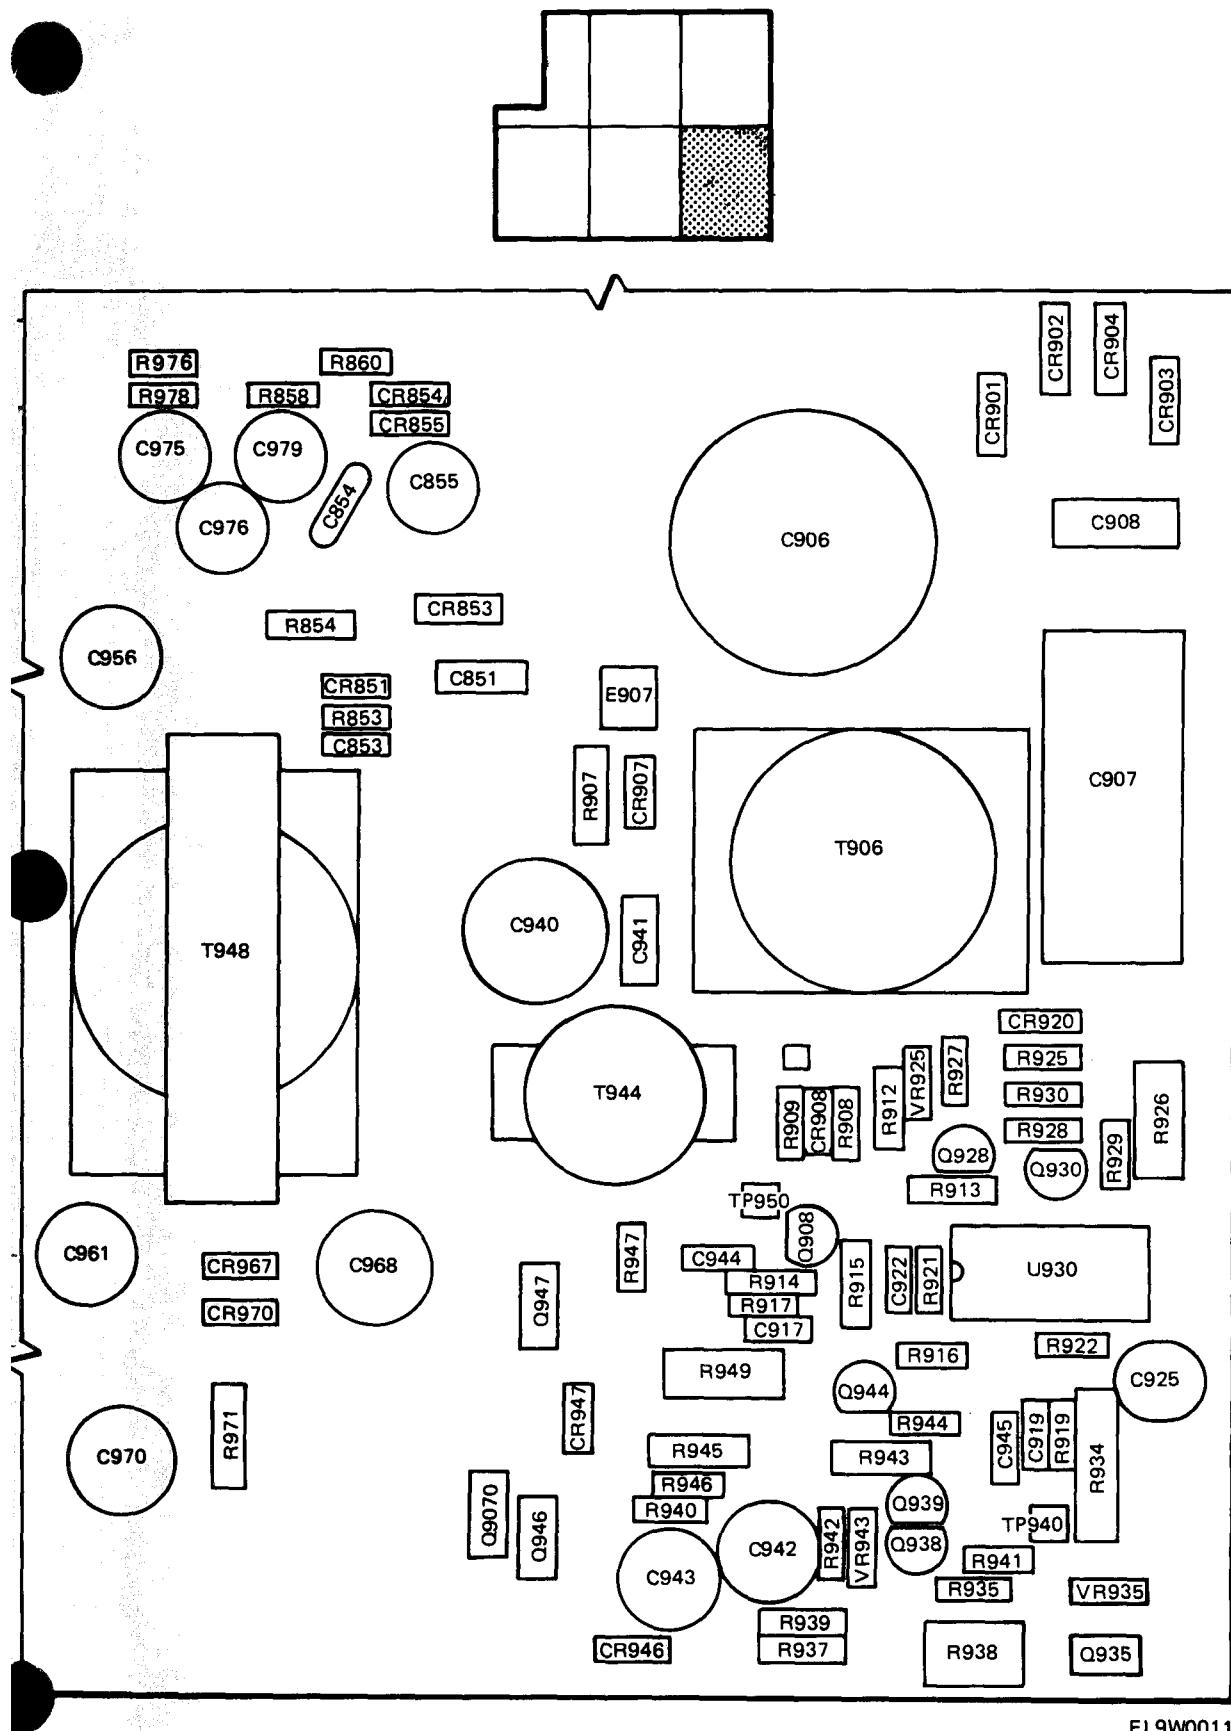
Circuit Card Assembly A1 (Sheet 4 of 11)
